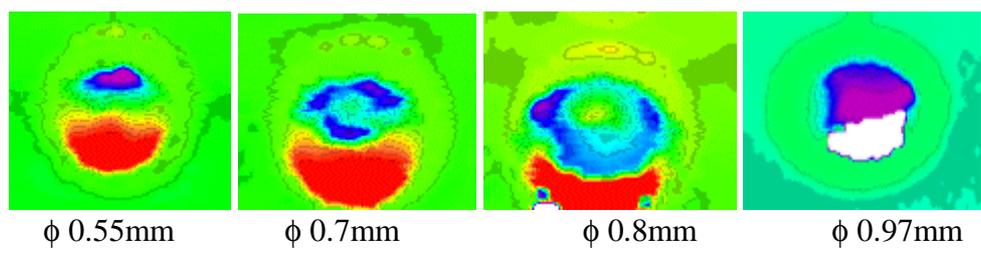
Example of contour maps of scanned holes in a PCB filled with solder paste (as a function of hole diameter)
